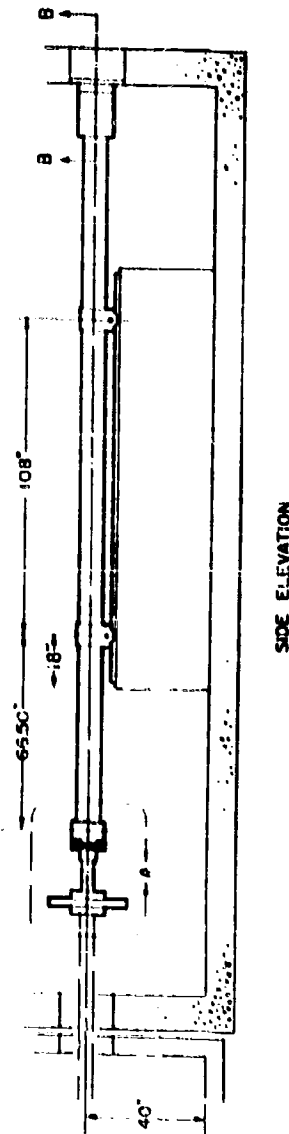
Driver Section Assembly Showing Diaphragm Latch Mechanism, Fill-Circulating Tube and Initiating Wire
